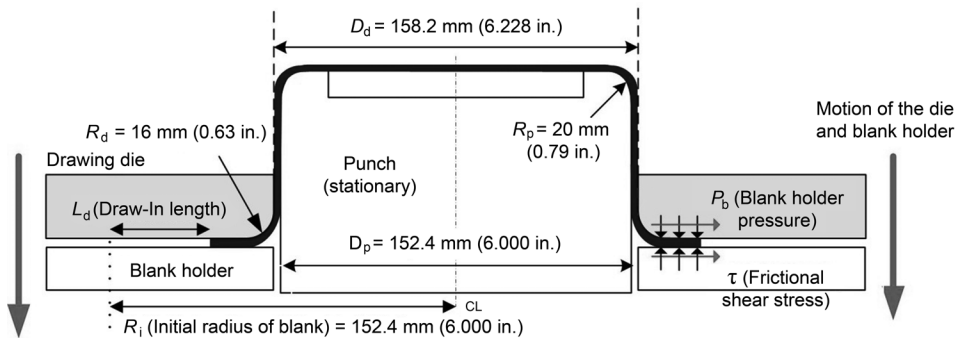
Tool geometry used in deep drawing of a round cup
